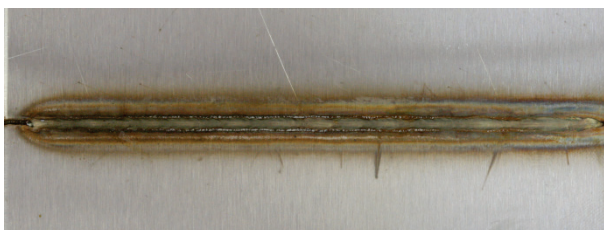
Corrosion attack of sample Ar2 (weld root)
